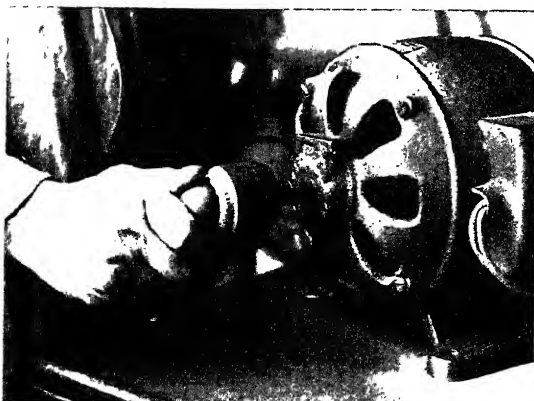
Smoothing the surface of the ball on a properly shaped emery wheel.
